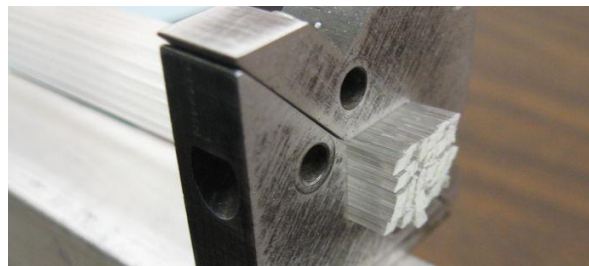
An image of a bundle of light guides after being individually rough cut with the Dremel tool. The cuts are not perpendicular, but there is little to no damage of the cladding.
